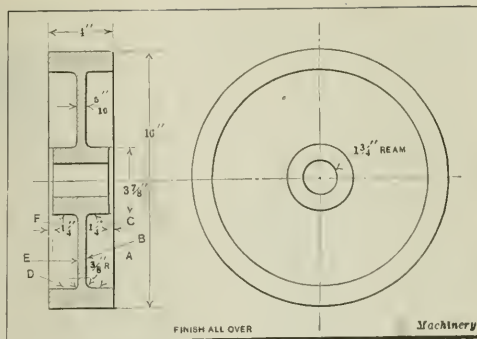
Flywheel Pulley produced at Lower Cost by Improved Methods
